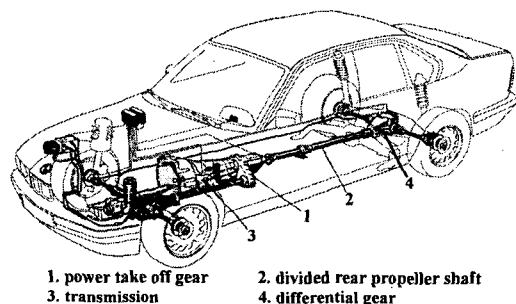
Schematic diagram of the propeller shaft for a rear wheel drive automobile.
